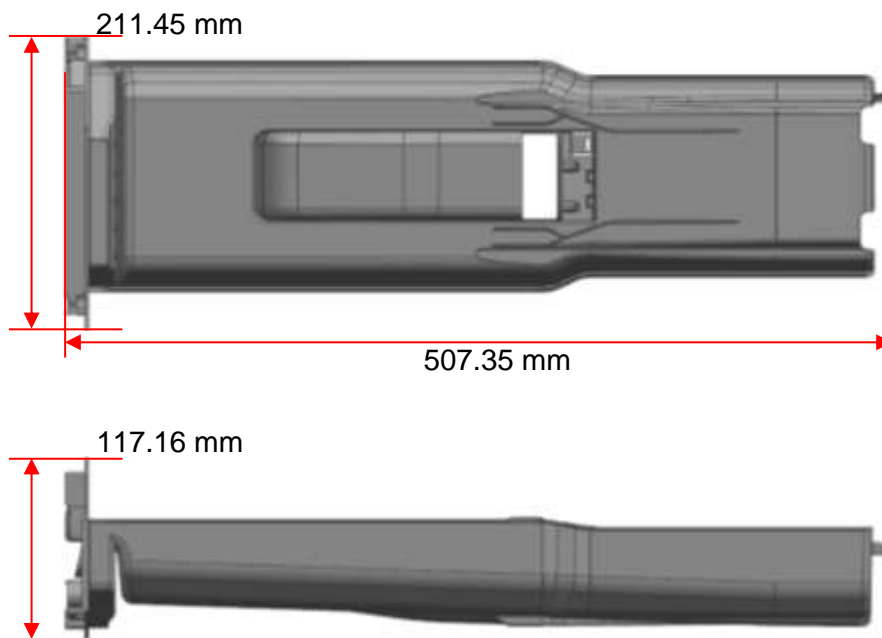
Geometrical Dimensions of Titan Big- Drawer Part
